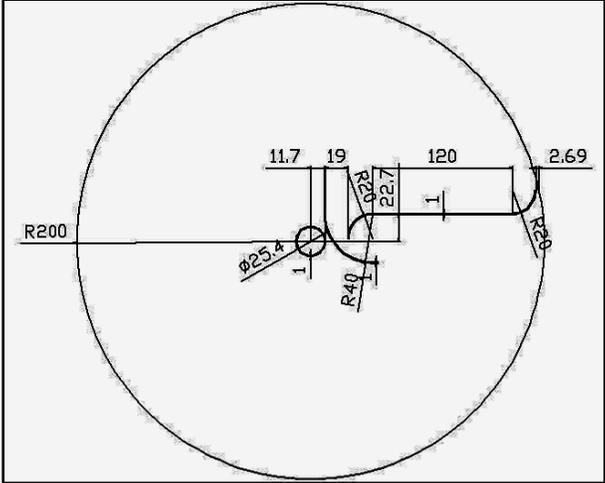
Cross section view with dimensions in millimetres (mm)
